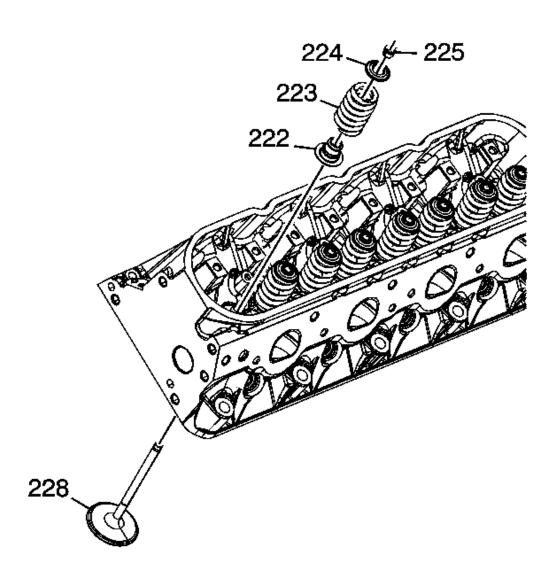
Valve Stem Keys, Valve Spring Cap & Valve Spring Courtesy of GENERAL MOTORS CORP.
